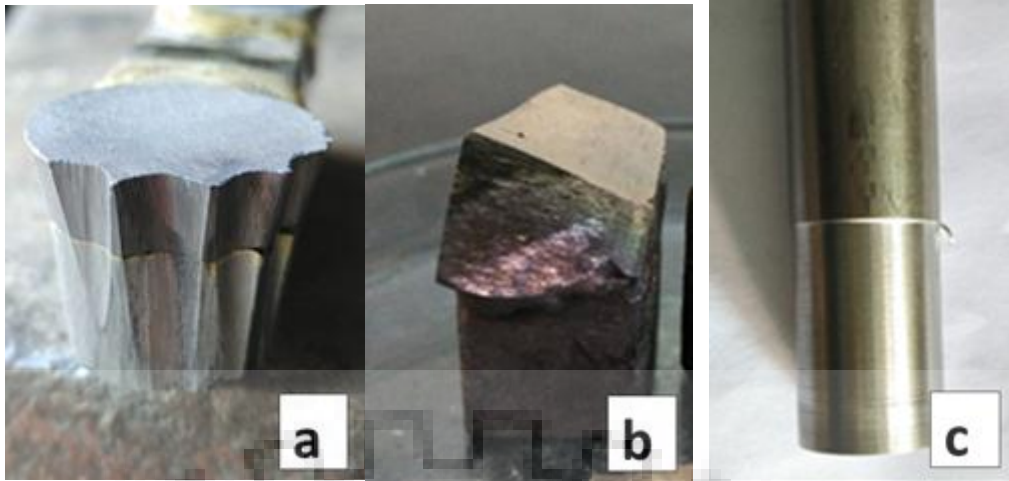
(a) Cermet disc tool, (b) Cemented carbide tool, (c) 304 stainless steel rod
